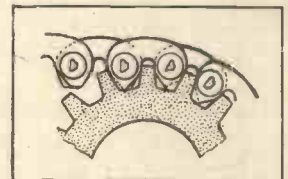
Section of "Silent" chain. Inset shows how the chain fits the sprocket.
